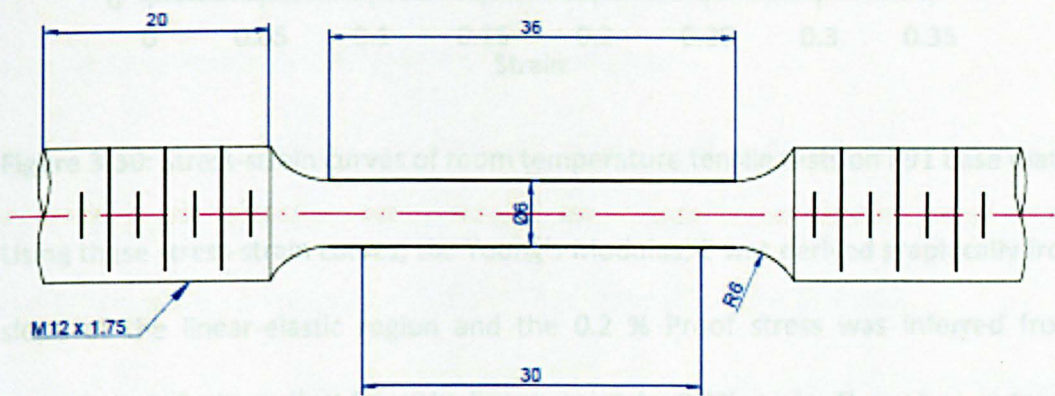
Dimensions of round tensile test specimen. All dimensions in mm.
